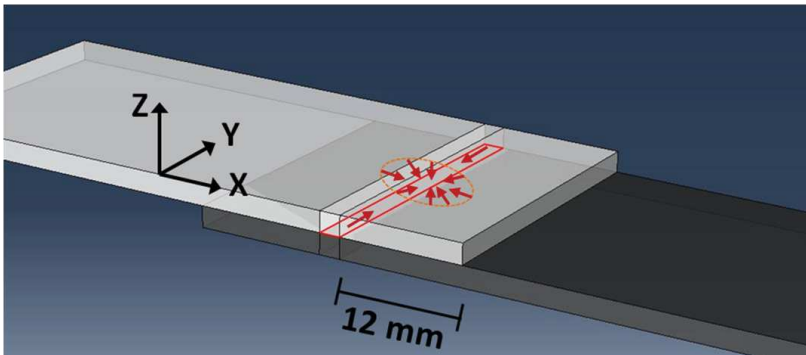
Two components joined with laser transmission welding. The weld seam is represented by a red rectangle. Arrows symbolize the direction of thermal strain caused by cooling after the welding process.
